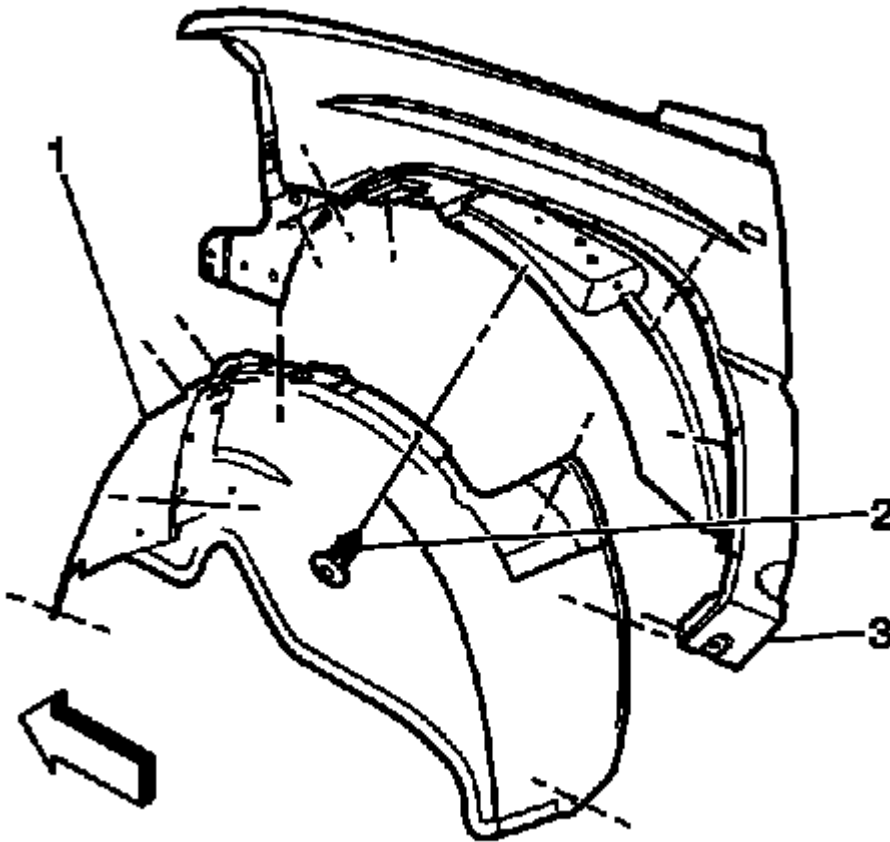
View Of Wheelhouse Panel & Push-In Retainers
